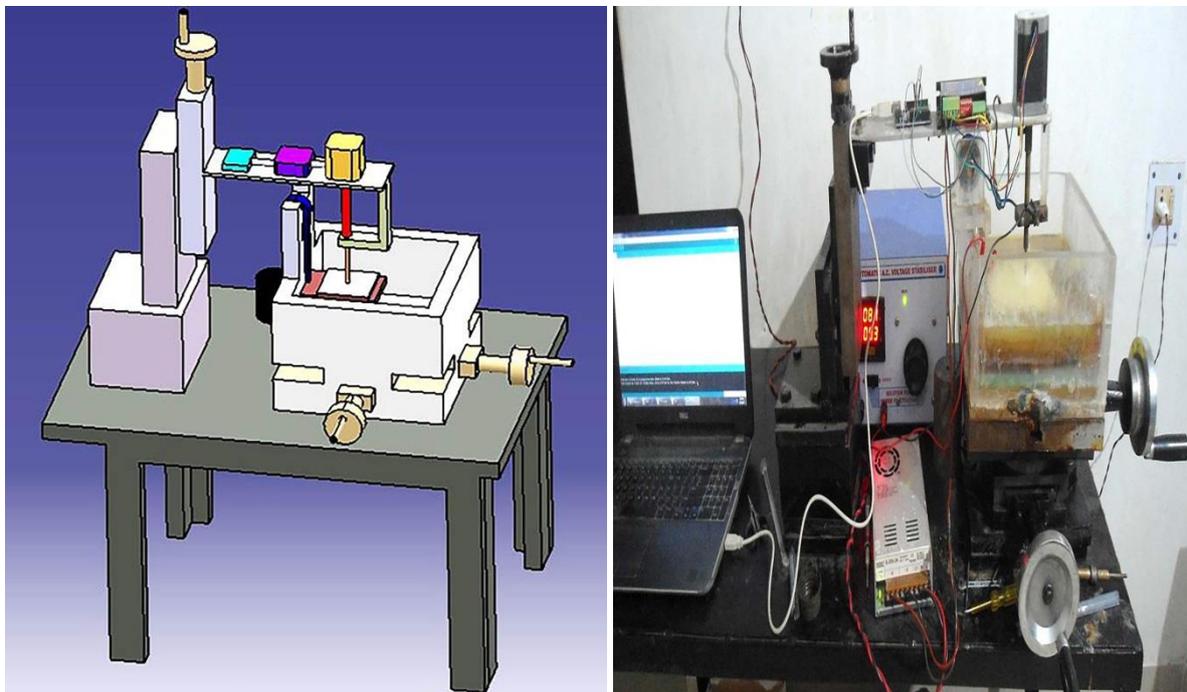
ECDM Model and Manufactured ECDM machine setup
